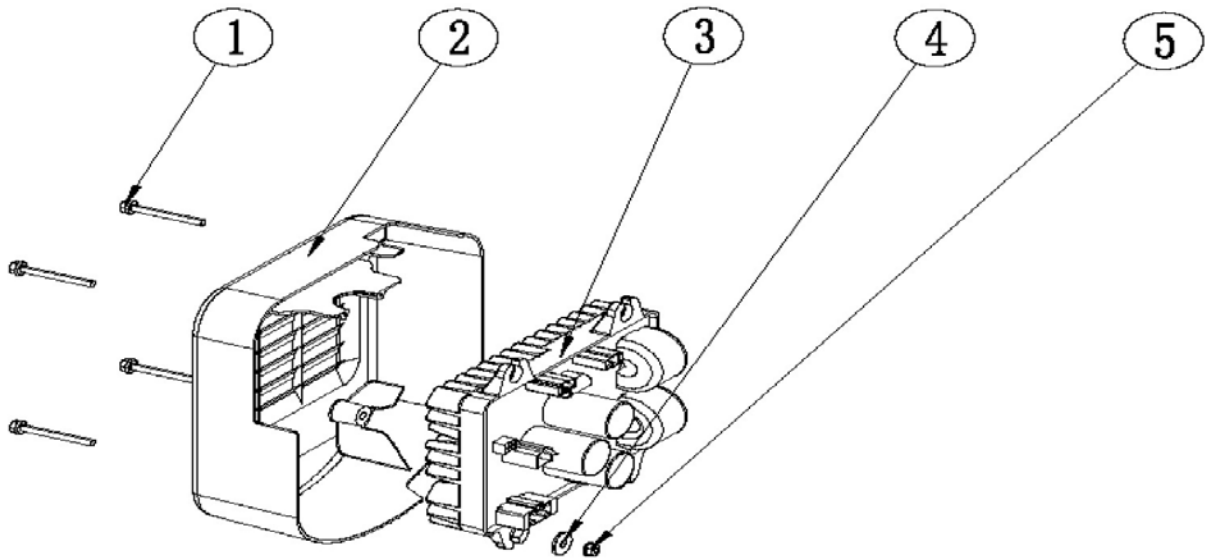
Spare parts drawing 3 PG-I 42 SE
